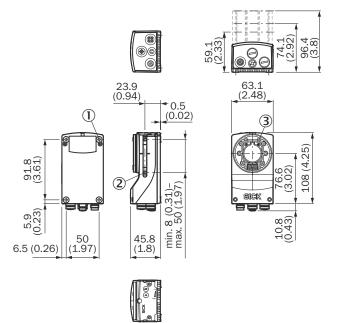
Structure and device dimensions, unit: mm (inch), decimal separator: period
